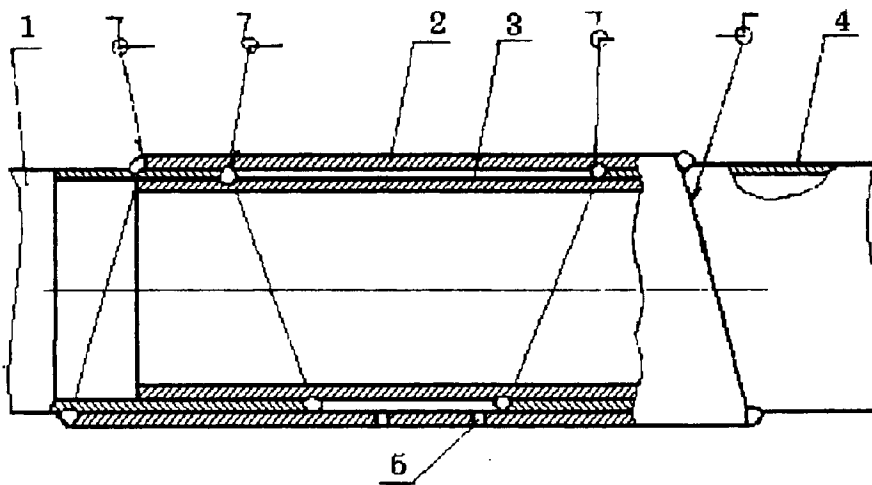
Repair assembly scheme: 1 - pipe end from the fairway side,
